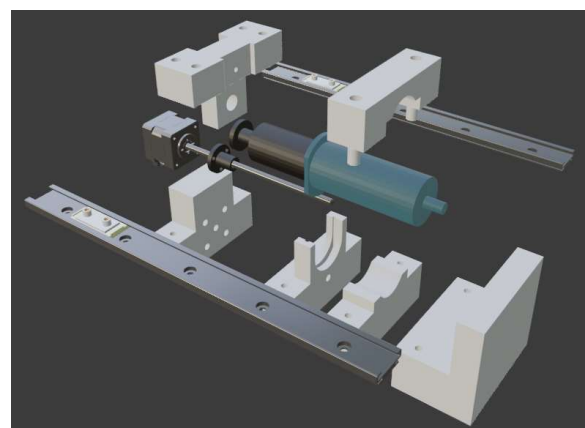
Exploded 3D model of the pump design, showing the 3D printed structural parts in white.
